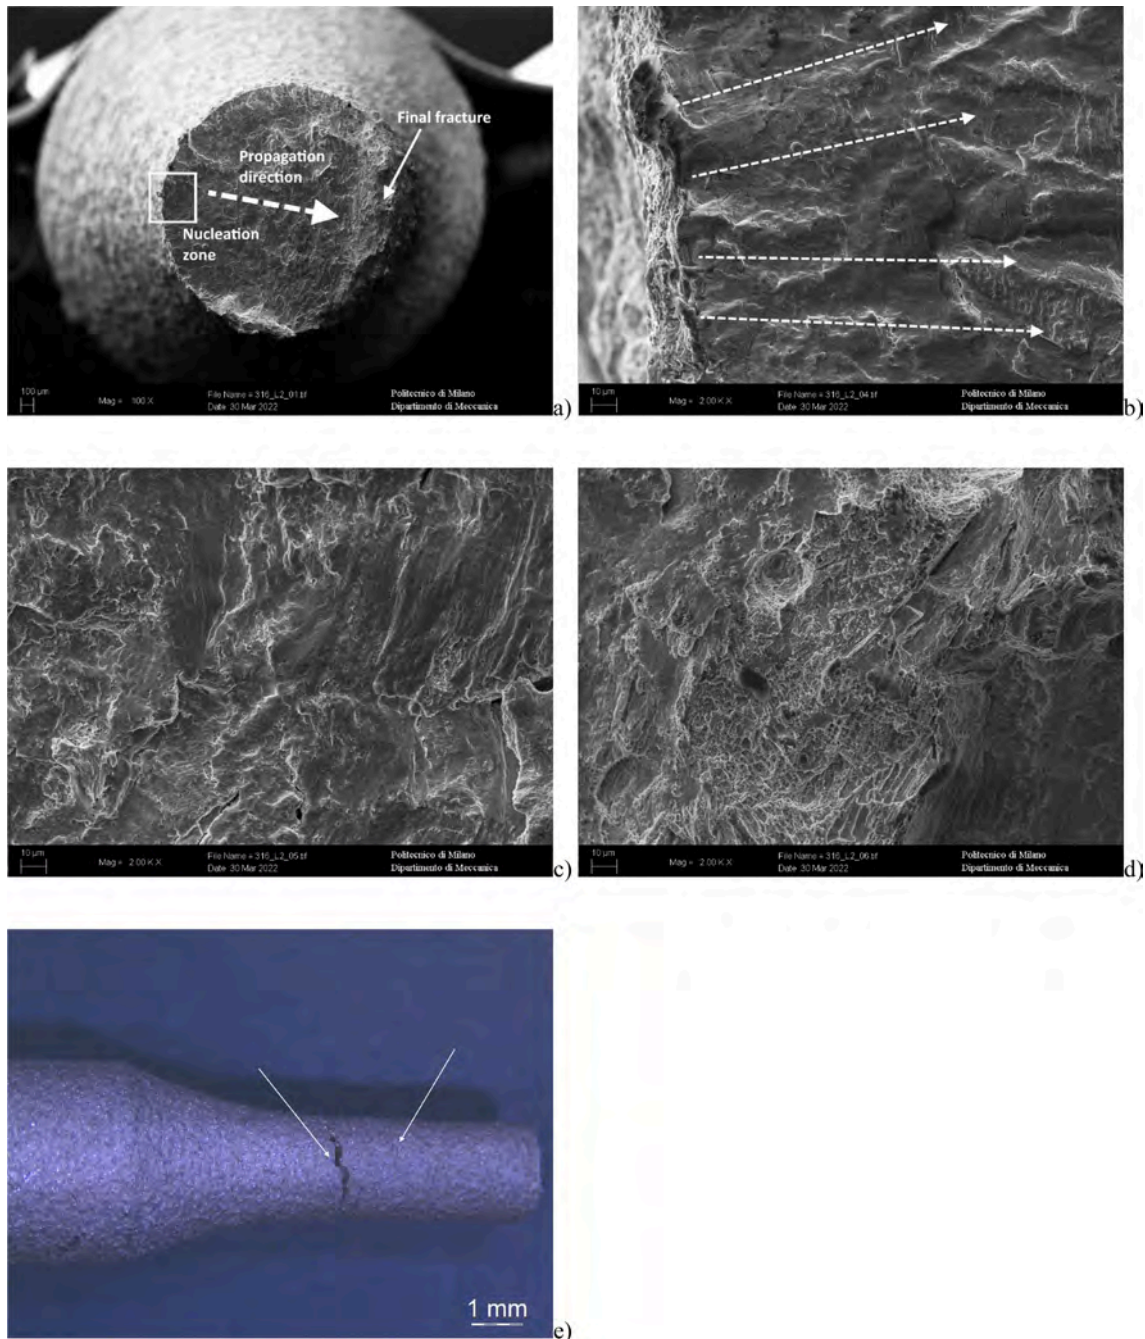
Fracture surface analysis of specimen LCF1 - (a) fracture surface, (b) nucleation zone, (c) propagation zone, (d) final fracture. Multiple crack nucleation along the specimen gauge length, as shown in (e).
